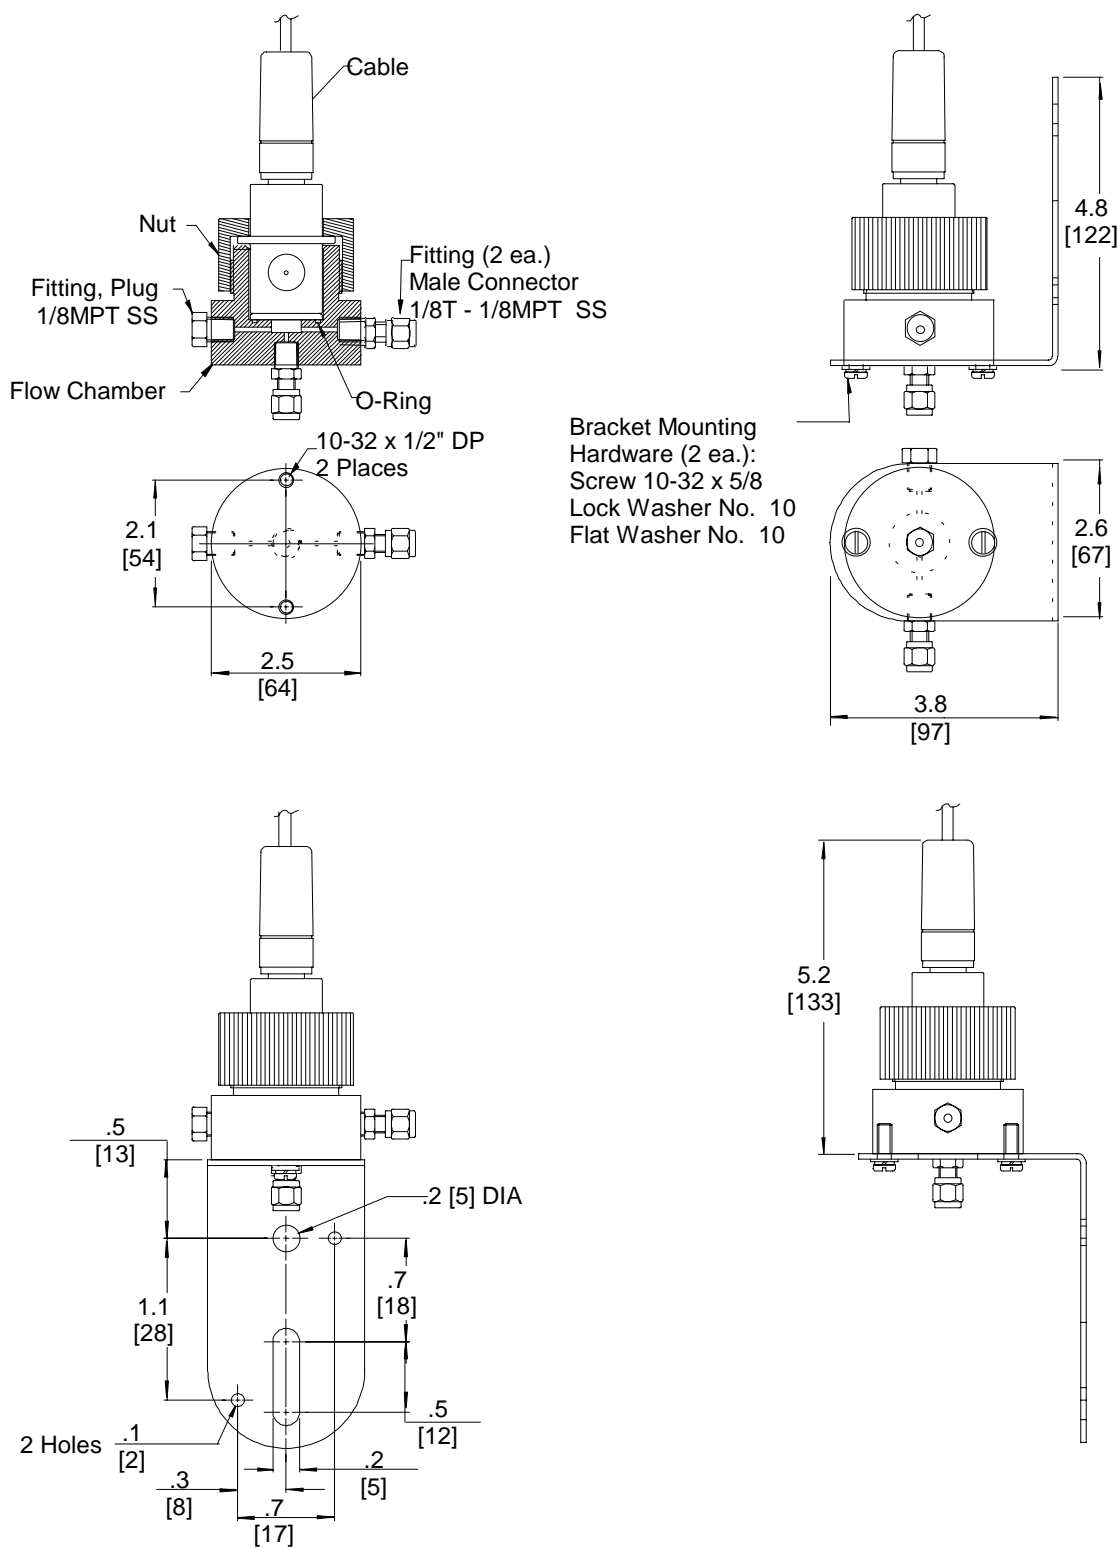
DIMENSIONS AND COMPONENTS OF NON-RECHARGEABLE SENSOR WITH IN-LINE FLOW KIT
